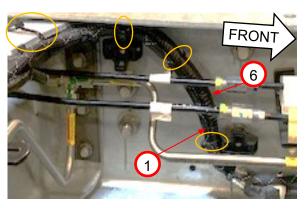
Chassis harness (1), OEM chassis harness (6), zip ties (circled).
